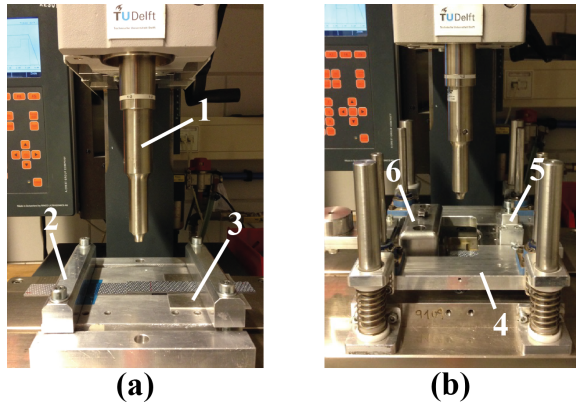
Ultrasonic welder, circular sonotrode and welding jigs used in this study: (a) Jig 1 and (b) Jig 2. 1. sonotrode, 2: bar clamp in Jig 1, 3: supporting plate, 4: sliding platform in Jig 2, 5: clamp for the top adherend and 6: clamp for the bottom adherend.
